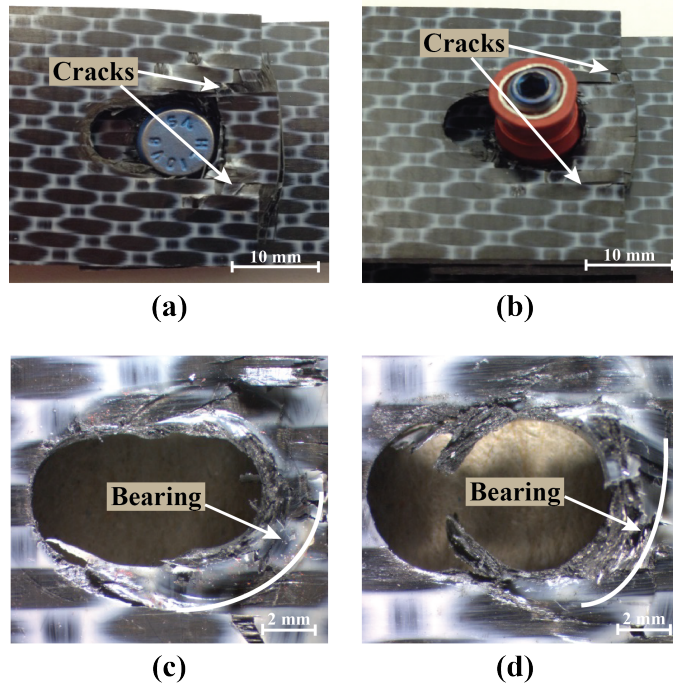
The top (a) and bottom (b) view of mechanically fastened joints (HL10V6) after DLS tests and fracture surfaces of outer (c) and inner (d) adherends after removing the fastener.
